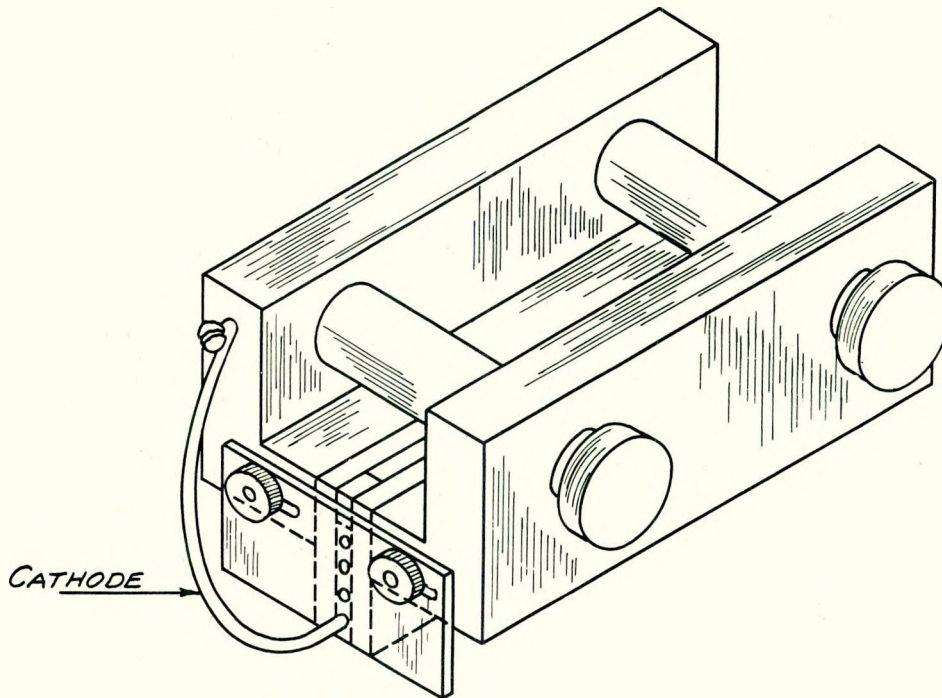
Line-Type Cathode Assembly, Similar to Figure 2, But Provided With Extended Glass-Plate Shields.
